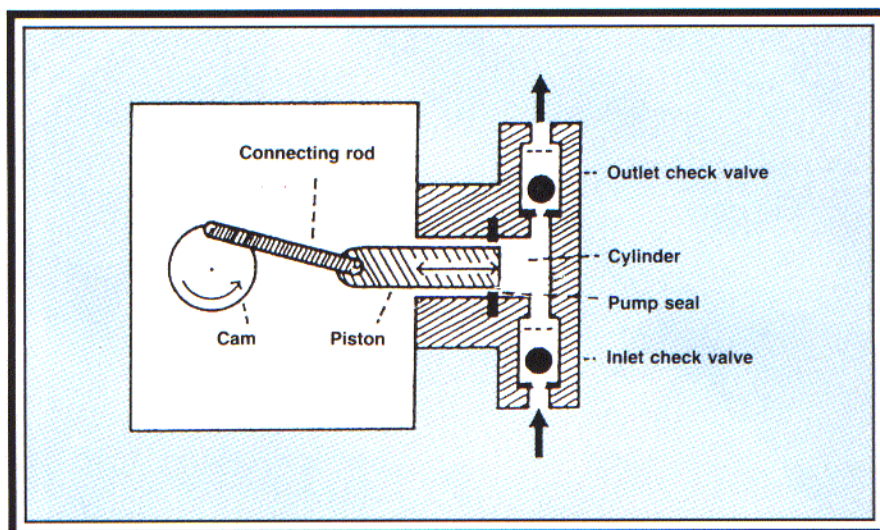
Schematic showing the common pump parts of reciprocating piston pumps. (Reprinted from reference 3 with permission.)
